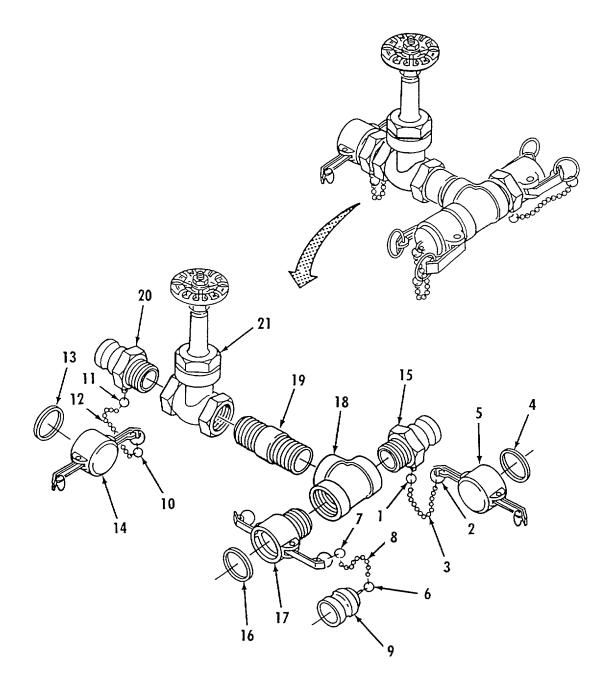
3-inch Fueling Manifold Assembly Repair.
